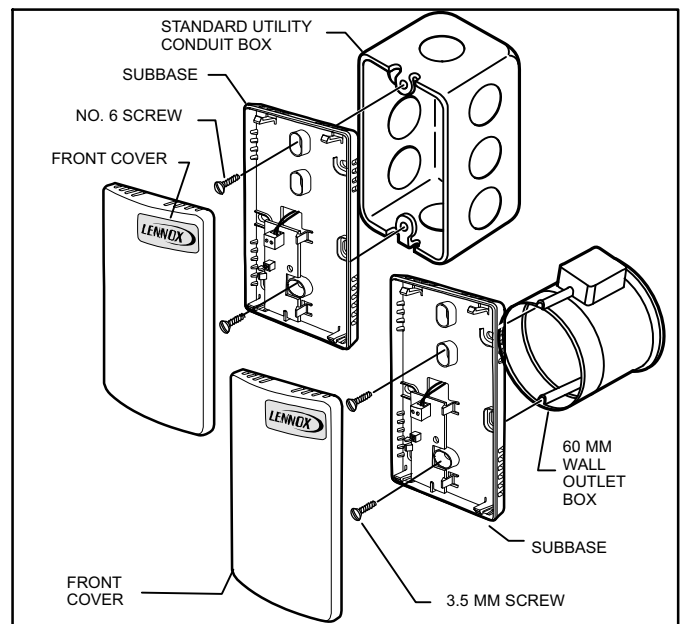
Installing zone sensor on standard utility conduit box or 60 mm wall outlet box
